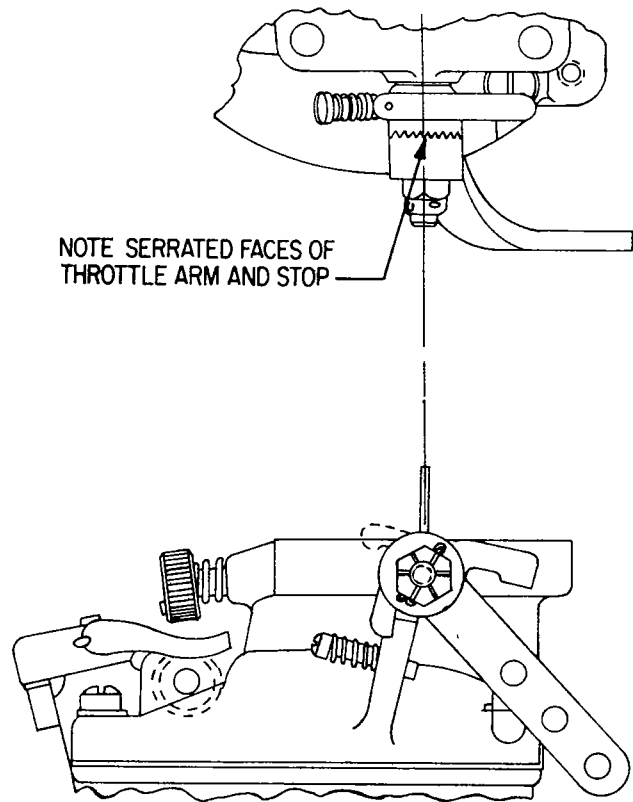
New Throttle Arm Configuration Showing Serrated Faces of Arm and Stop Levers
